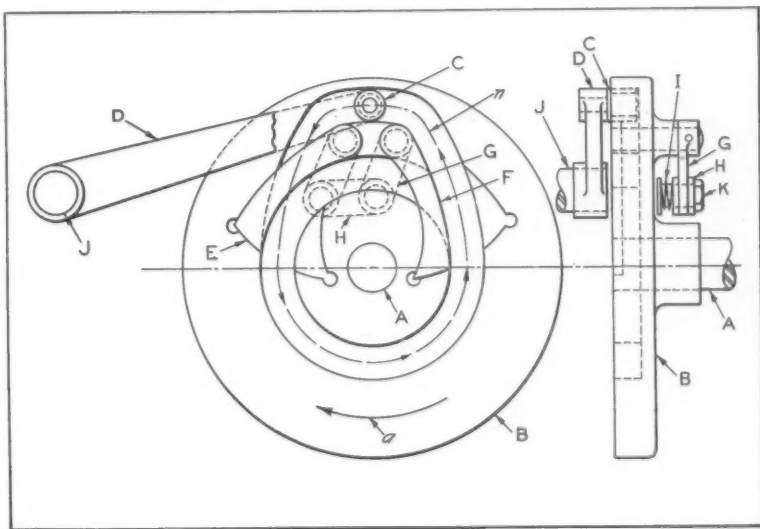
Cam Mechanism Designed to Raise and Lower Lever *D* on Each Alternate Revolution of Shaft *A
